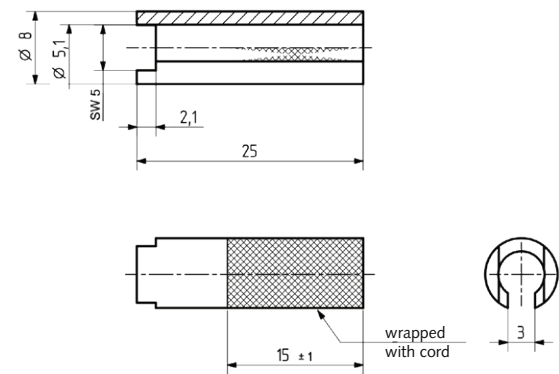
Mounting tool Type 1300A65 for cable Type 1967...
